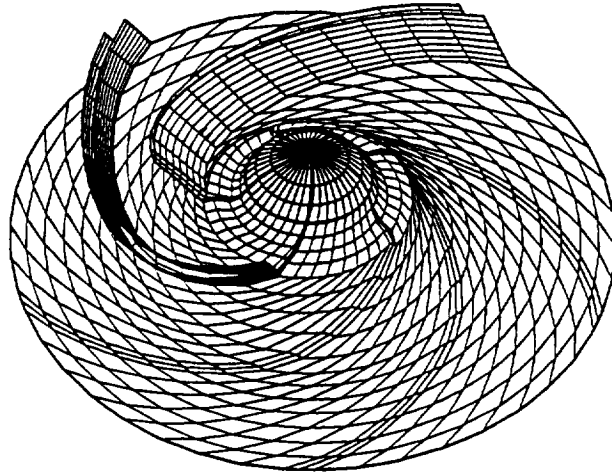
Impeller, Without Shroud, Showing Two Blades
